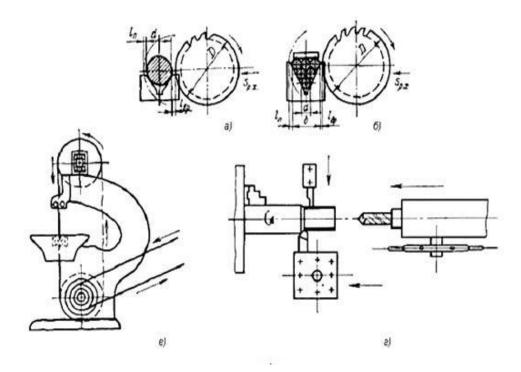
Cutting of rolled stock: a - disk saw of one rod; B - disk saw block of rods; in - a band saw; g - on a turning drilling and cutting machine
